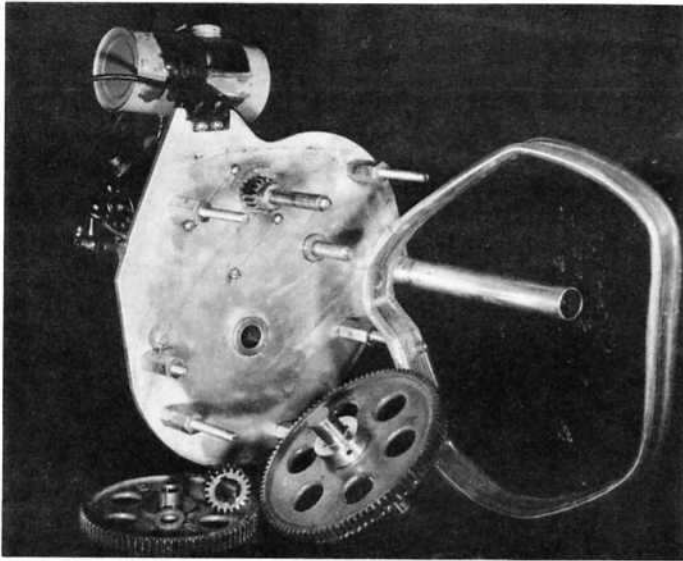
Gear box grease seal, lathe change gears, thrust washer and compound steel bushing,
